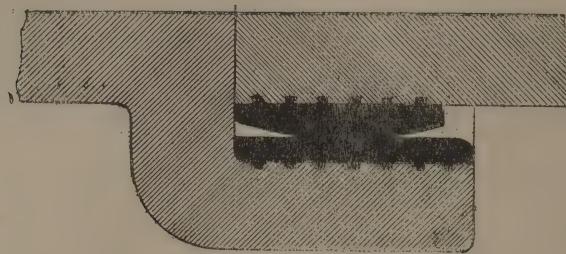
SECTION OF SELF-ADJUSTING JOINT.
